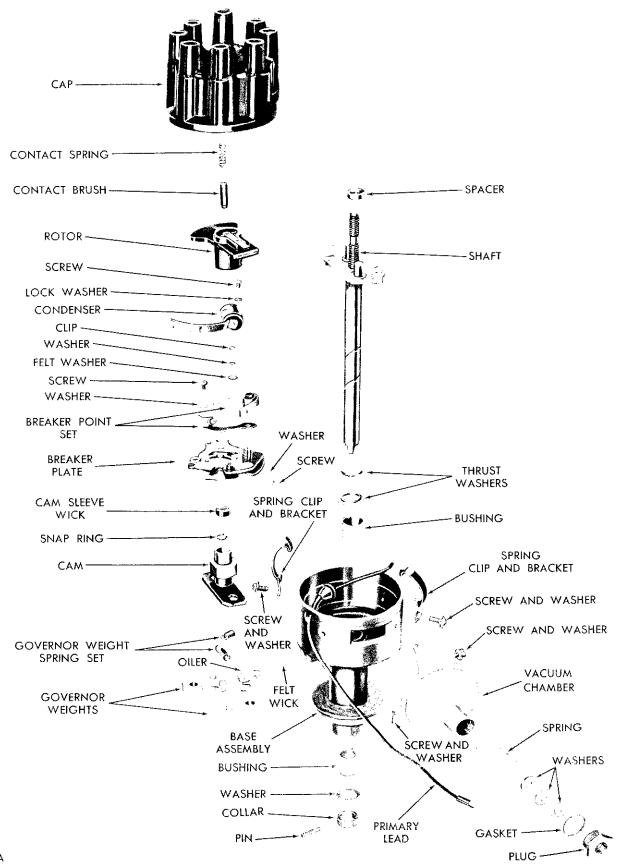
Ignition Distributor (Exploded View) Single Breaker
